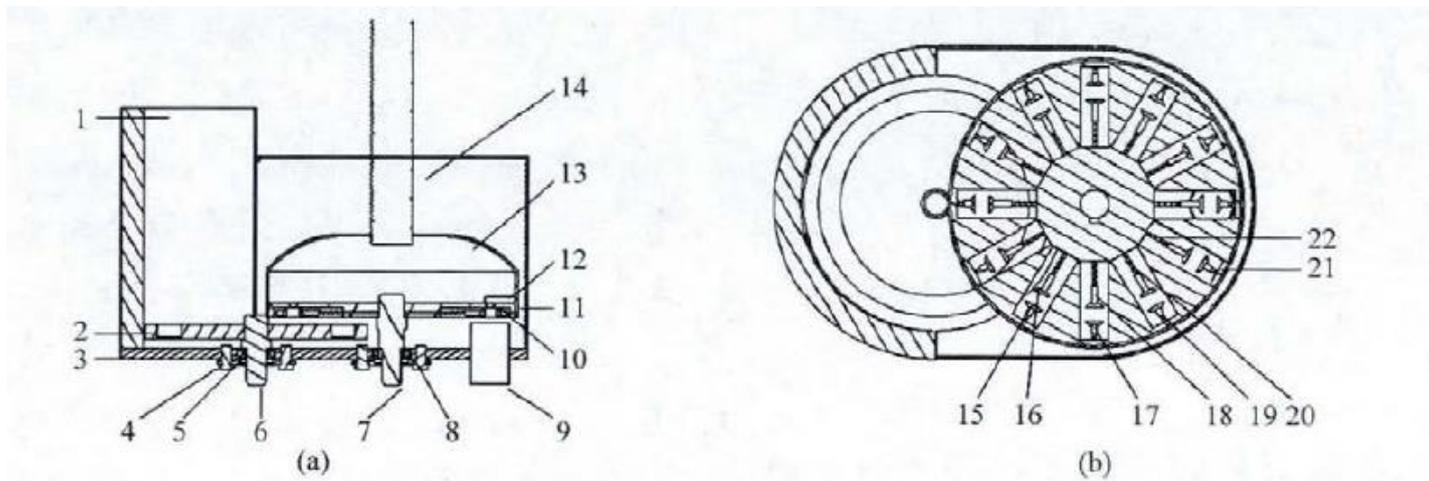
Friction vertical disc seed-metering device 1. cast disc 2. combined type plate 4. push seed plate 5. press plate 6. clear steel wire 7. inlet 8. cast cam 9. dwell cam 10. housing (row port) 11. spindle
